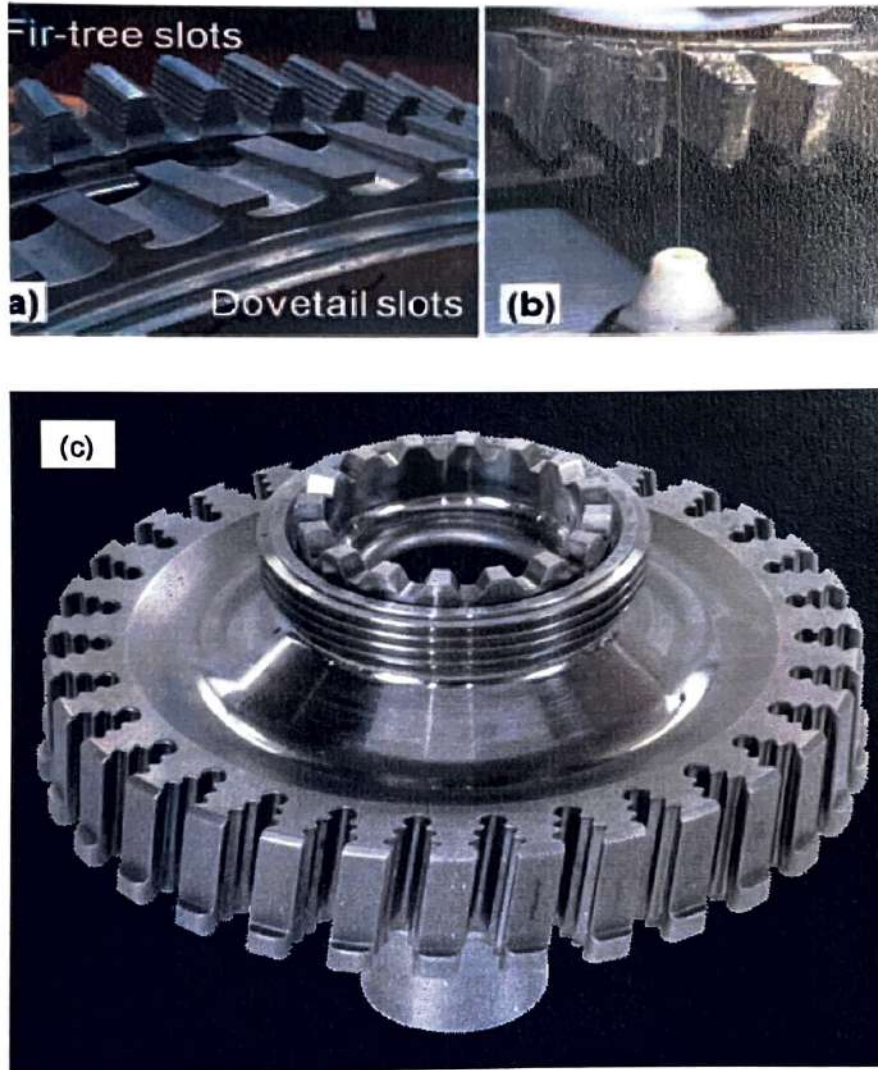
Wire Electrical Discharge Machining (WEDM) Process
